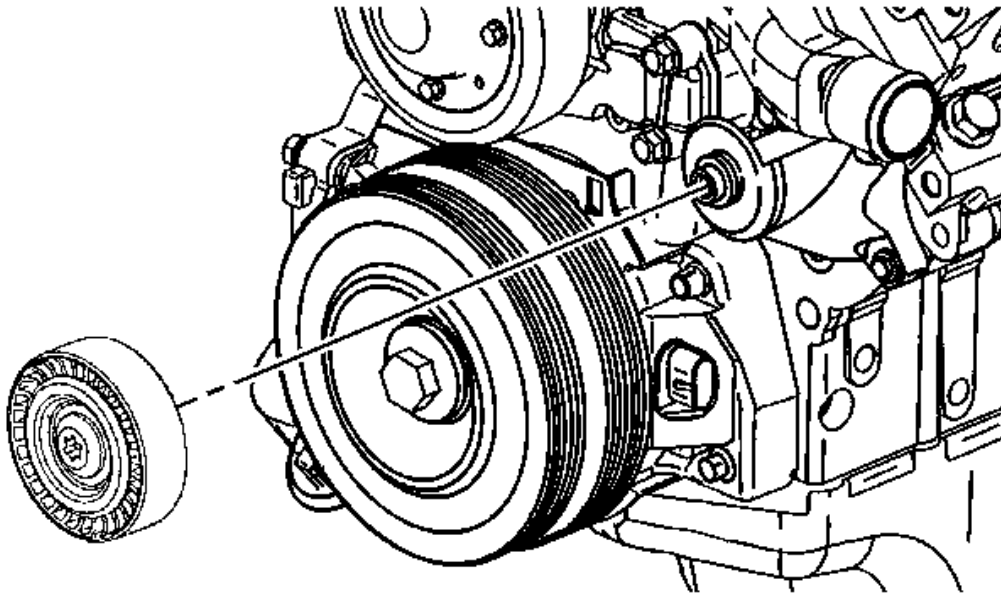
Identifying Drive Belt Idler Pulley - Lower
